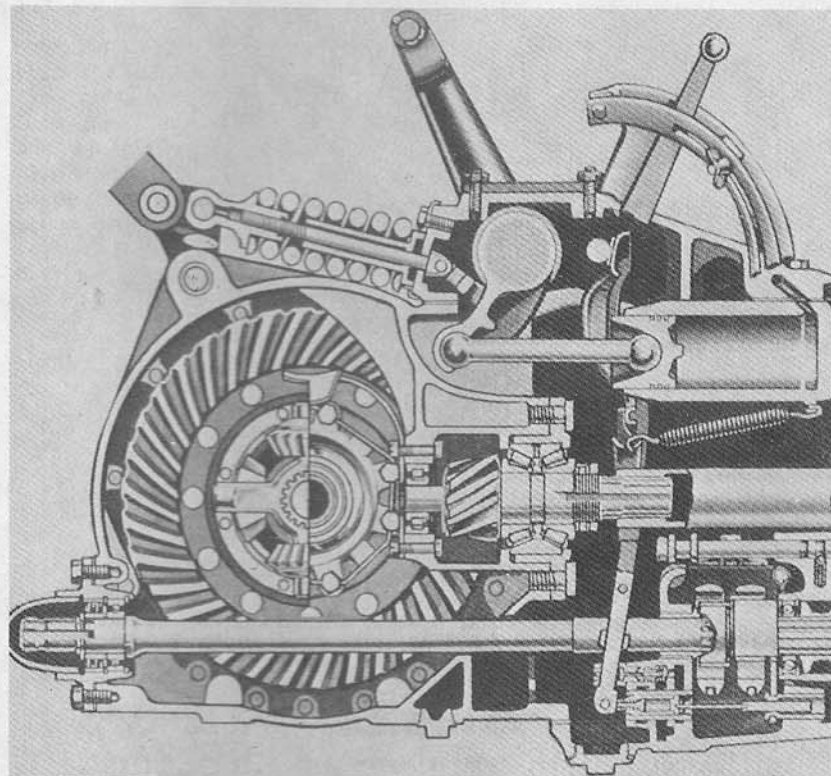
Model TO30 differential, main drive bevel ring gear and pinion, hydraulic lift pump, lift (rock shaft) cover, and power take-off shaft assemblies are located in the rear axle center housing—right sectional view. TE20 and TO20 are similar
